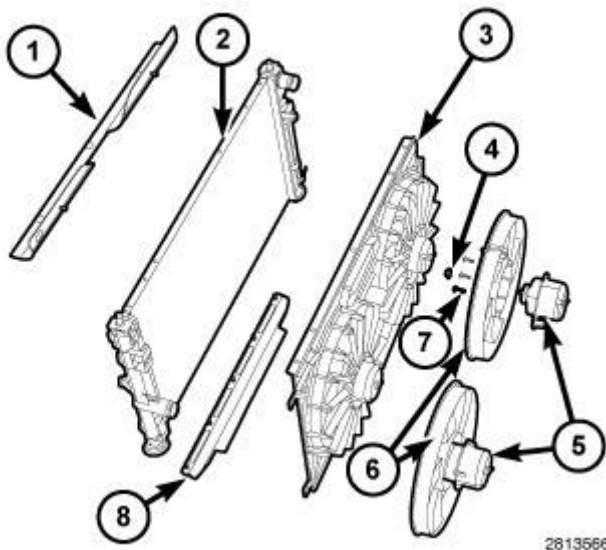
Lower, Fan Blade Retaining Nut & Fan Motor
